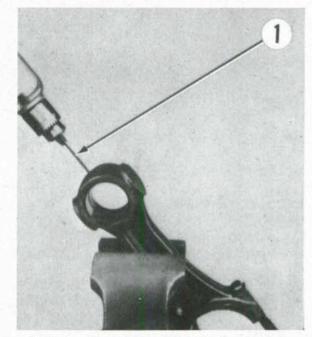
On all models, oil hole in top of piston pin bushing must be drilled after bushing is installed, but before reaming bushing to final size. Diameter of hole must be 3/64 inch (1.2 mm).
